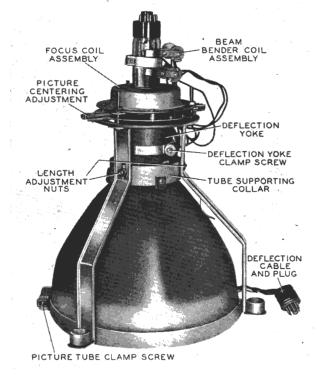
COMPLETED PICTURE-TUBE ASSEMBLY
